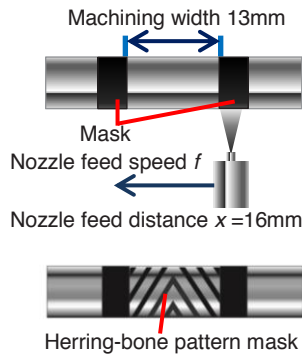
Workpieces with and without herring-bone pattern mask.
